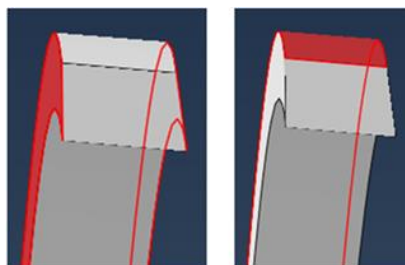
Thread flank contact surface (left) and crest contact surface (right) highlighted in red.
